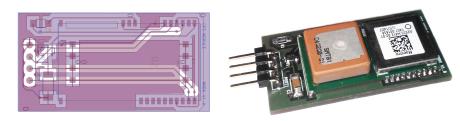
GPS module board a) OrCad PCB design, b) finished board.
